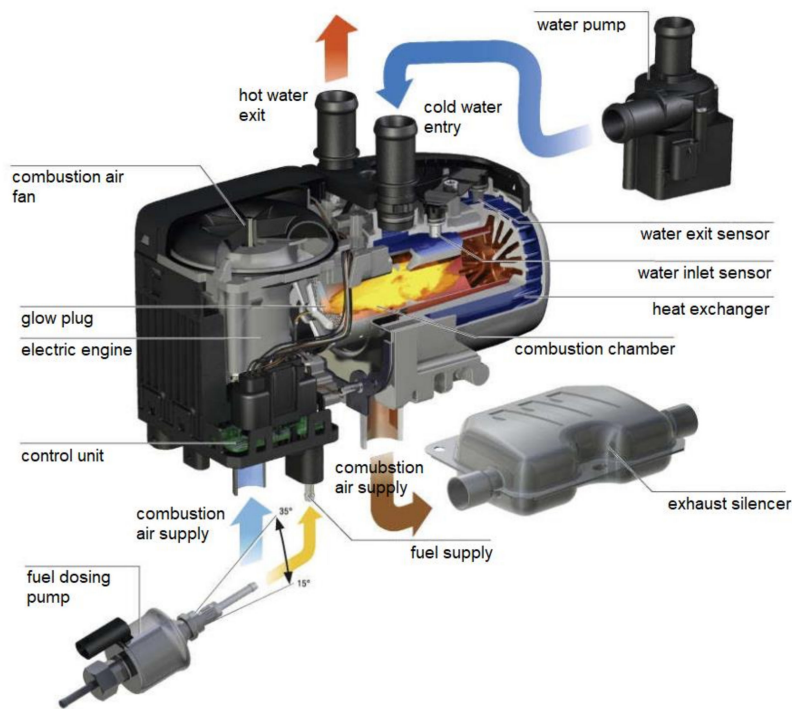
Detailed view of the assembly of a fuel heater from Eberspächer [22].
